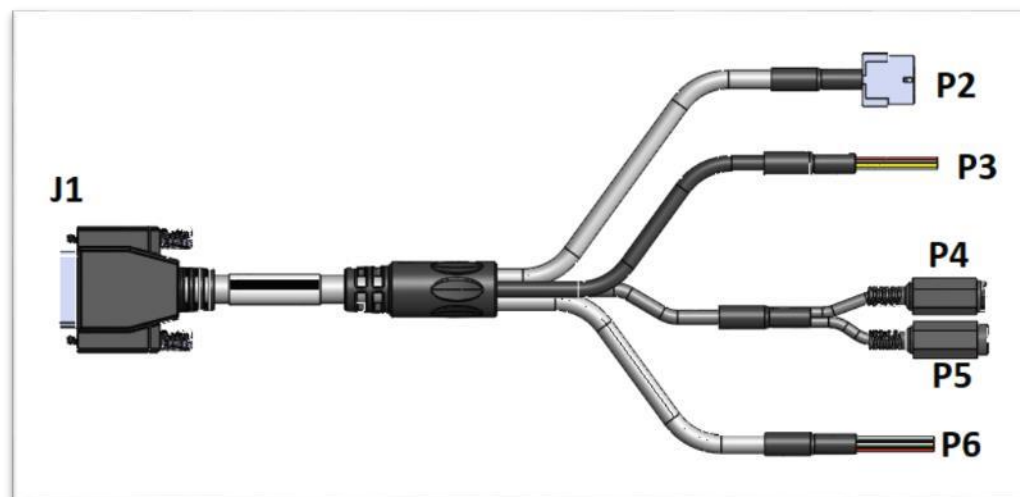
Enhanced Cradle Cable Drawing (GCAB579).
